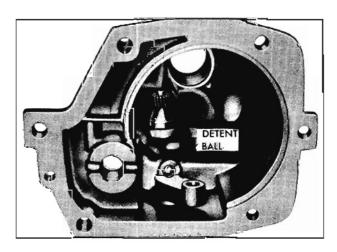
Installing Reverse Shifter Shaft and Detent Boll
